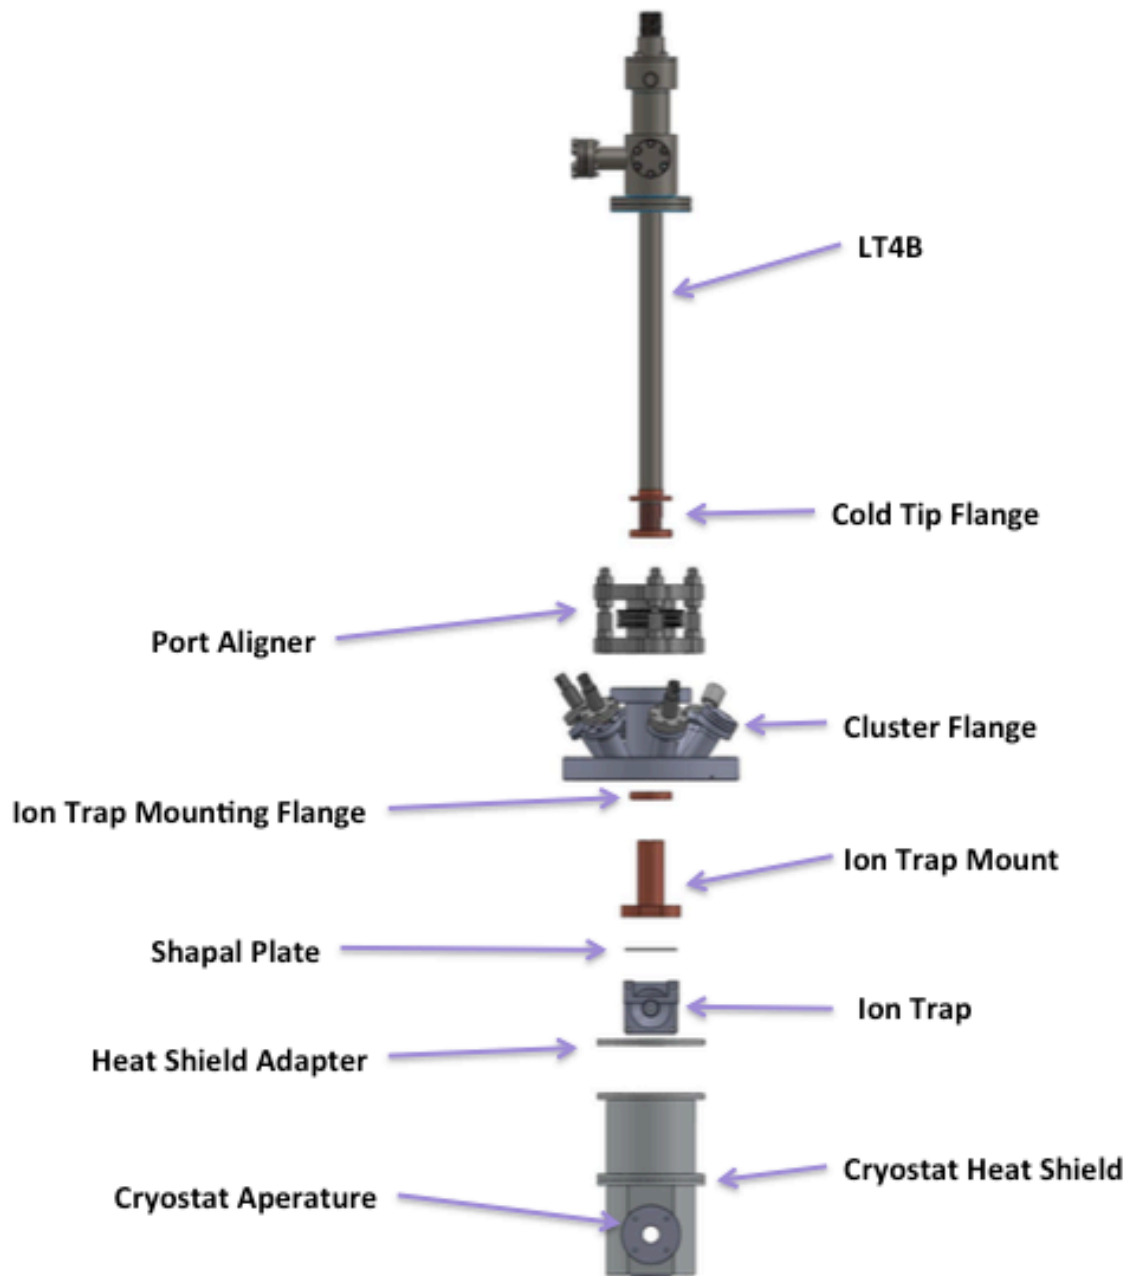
This schematic is an exploded view of all the components of the cryostat, including all necessary pieces for mounting and the heat shield assembly.
